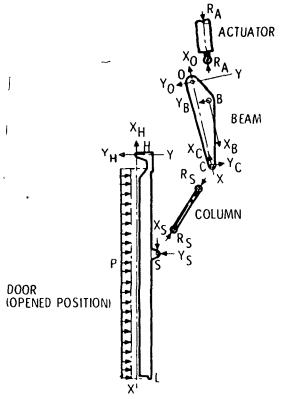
Free-body diagrams of door linkage assembly - design conditions C and D
